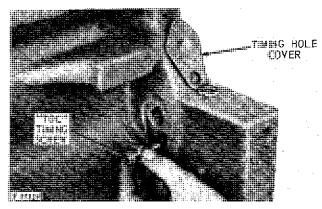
Using Timing Screw to Set Engine at "Top Dead Center"
